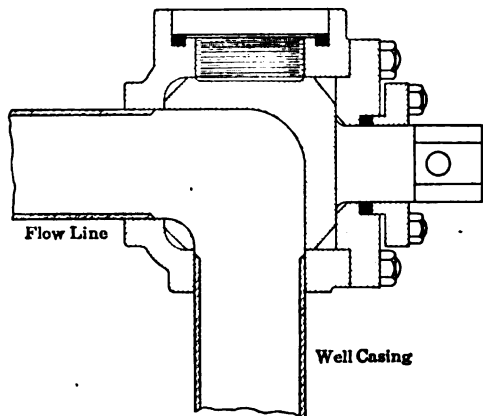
CONTROL CASING HEAD ON WELL SHOWING THE CURVED DEFLECTING SURFACE TO CHANGE GRADUALLY THE DIRECTION OF FLOW AND PREVENT THE MECHANICAL VAPORIZATION OF THE OIL. THE AREA OF THE PASSAGE THROUGH THE CASING HEAD BEING GREATER THAN THAT OF THE CASING INSURES A REDUCED VELOCITY AND PREVENTS FRICTIONAL BACK PRESSURE ON THE WELL.
